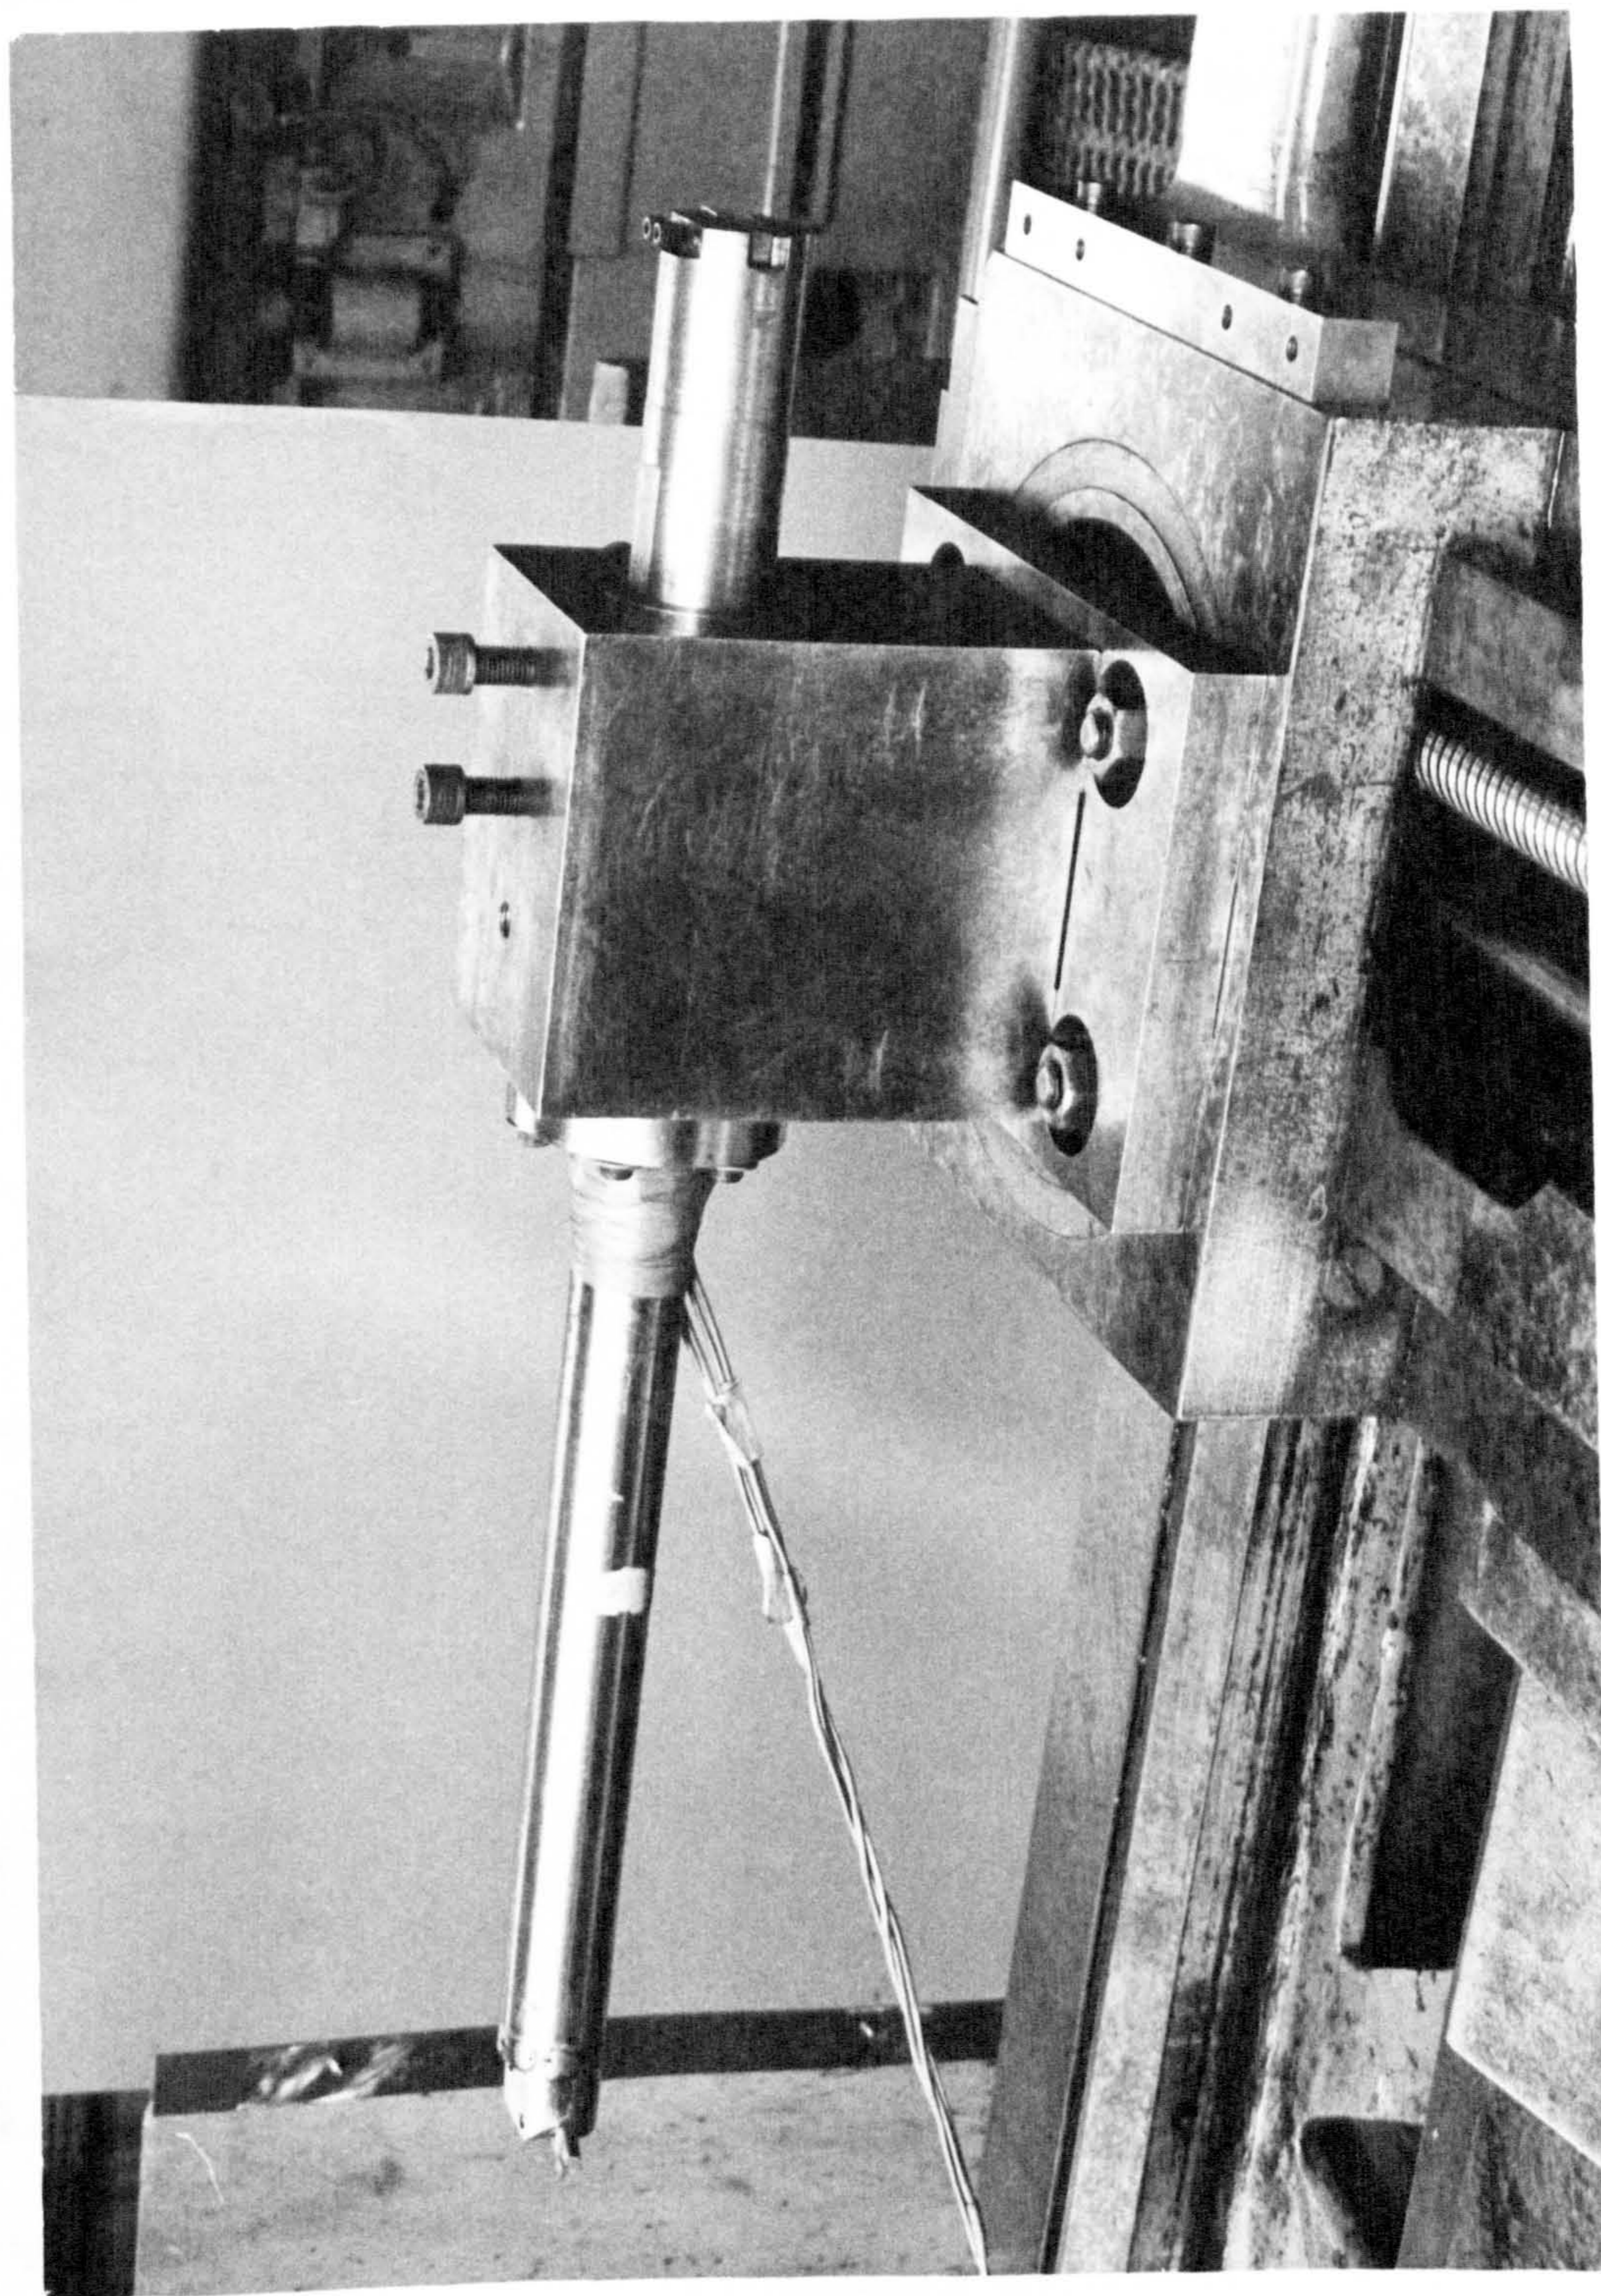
Close-up view of bar holder mounted on the cross-slide of the lathe
